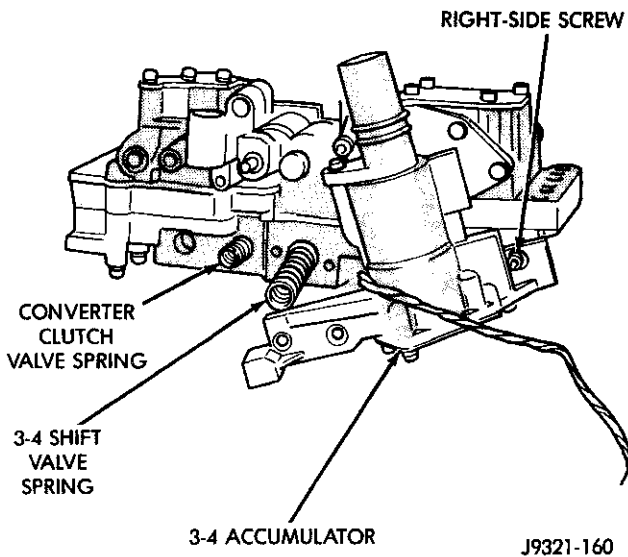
Converter Clutch And 3-4 Shift Valve Springs
